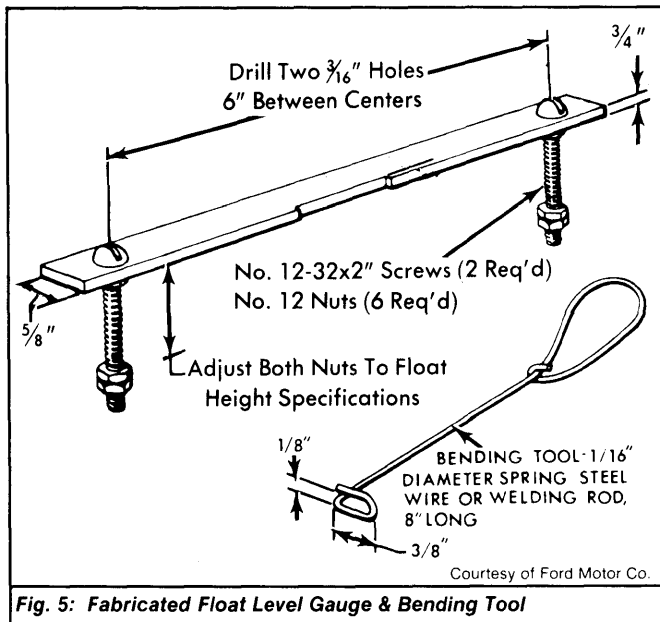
Fabricated Float Level Gauge & Bending Tool
